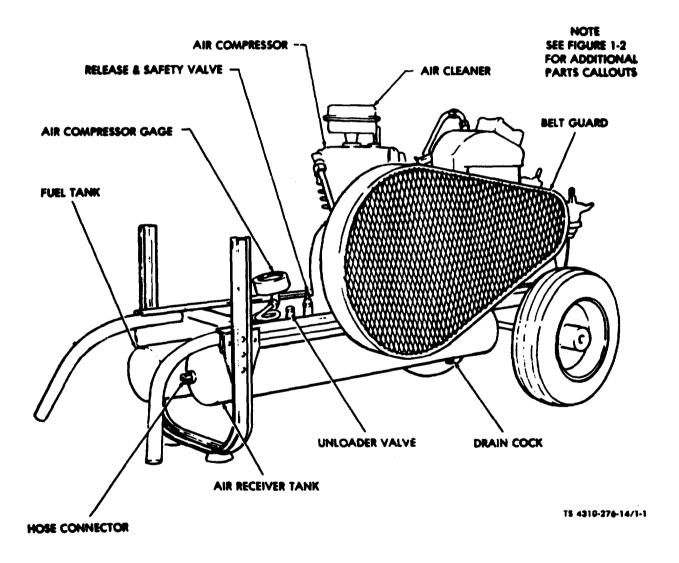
Air Compressor Assembly, Right Rear, Three-Quarter View.
